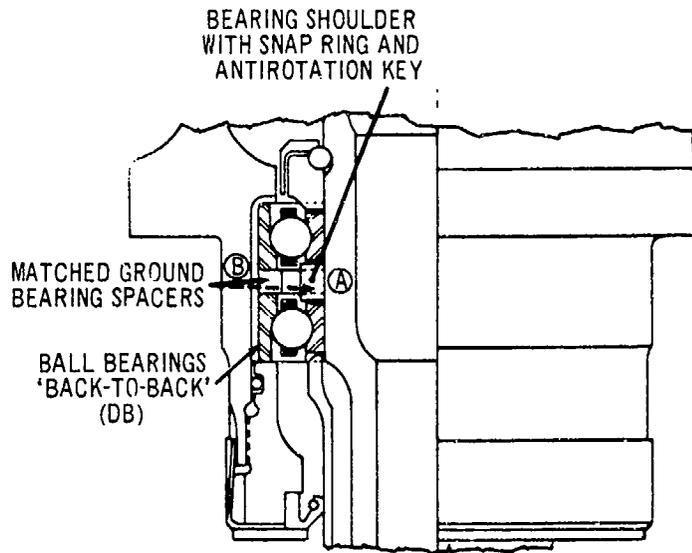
Preloaded Duplex Pair of Angular Contact Bearings for Propeller Drive
